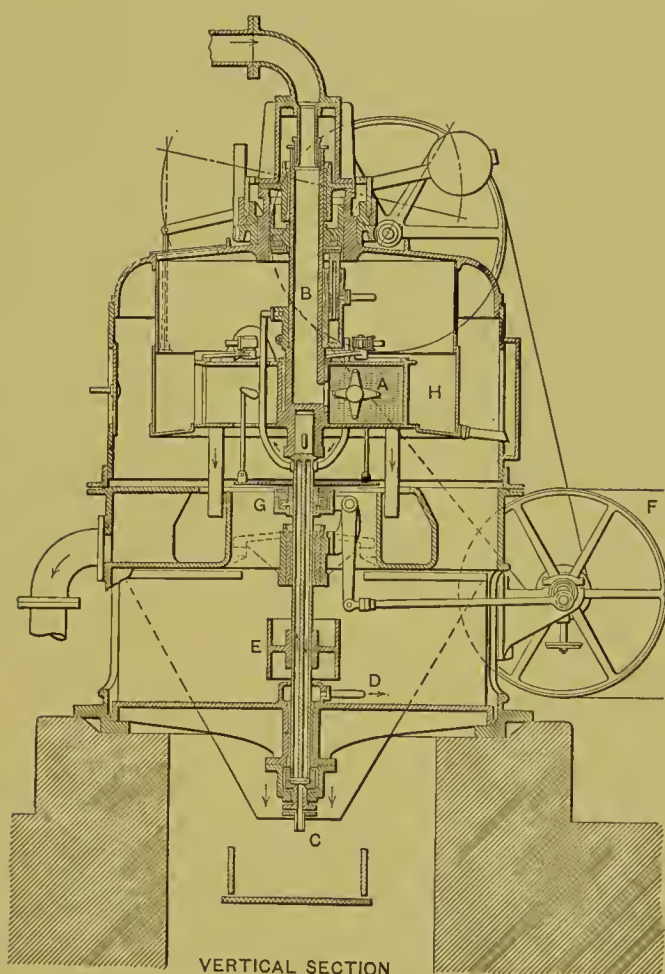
Centrifugal Dryer for Sewage Sludge (Engineering, 1909).
